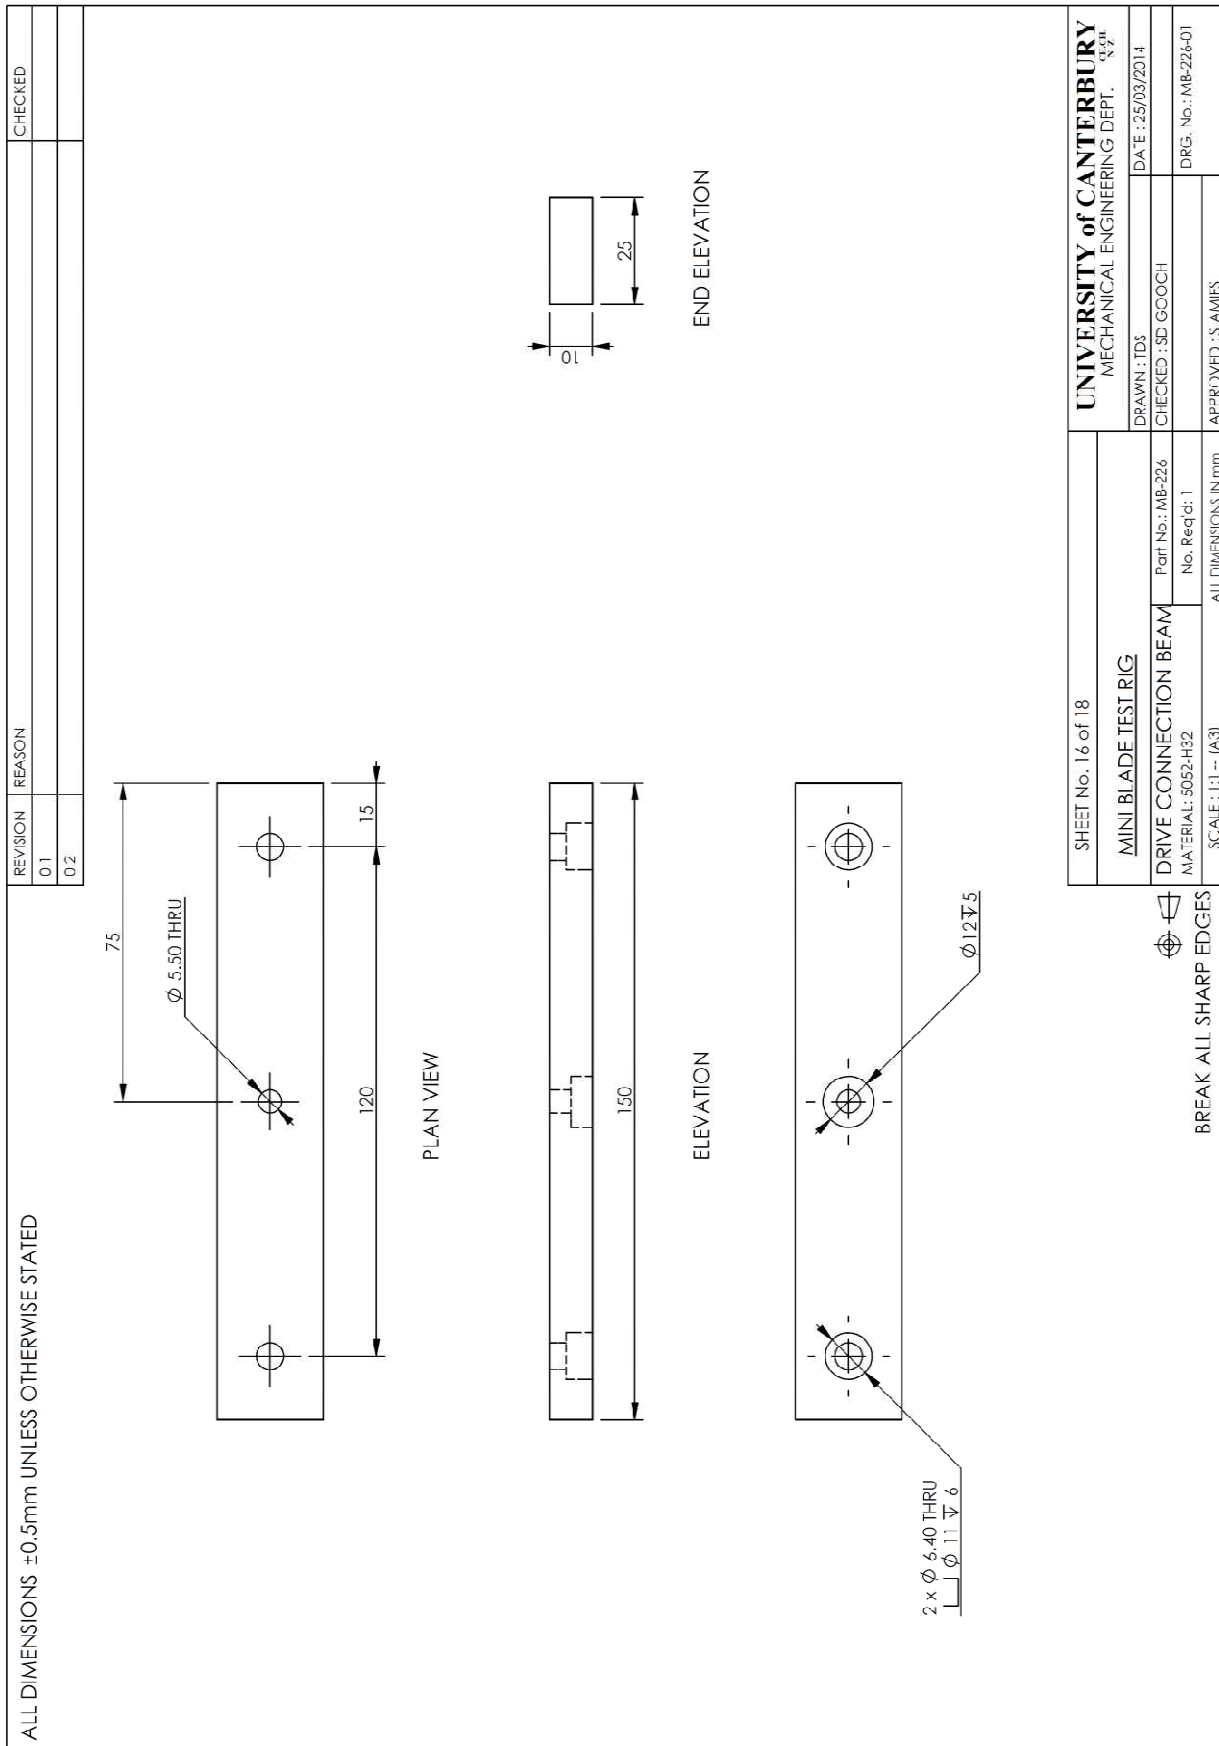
Manufacturing drawing of the drive connection beam in variable stroke test rig.
